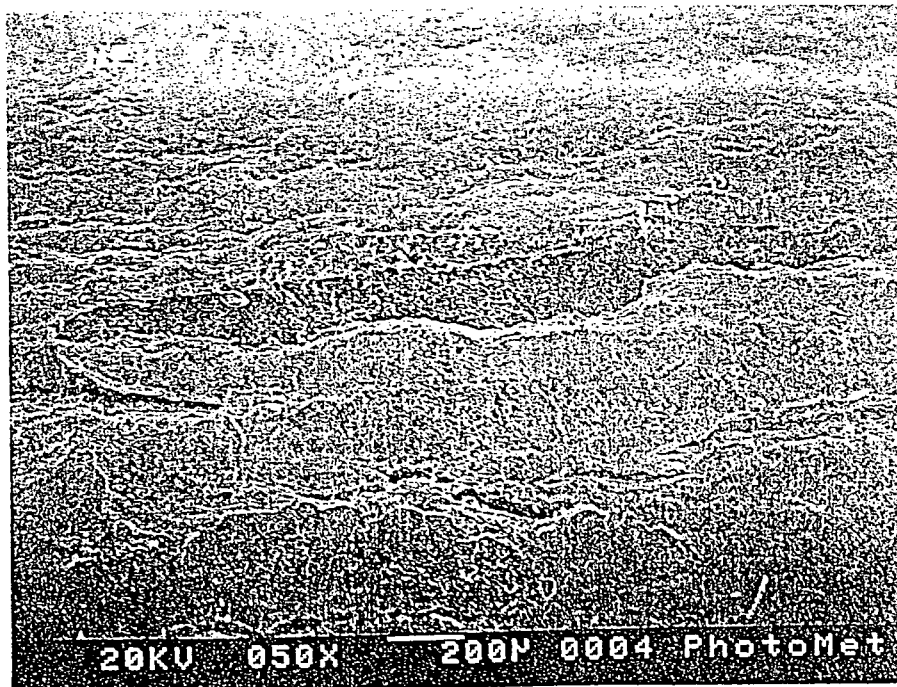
Close-up of the cracks in Contact #7, bend B, in Figure 16.
